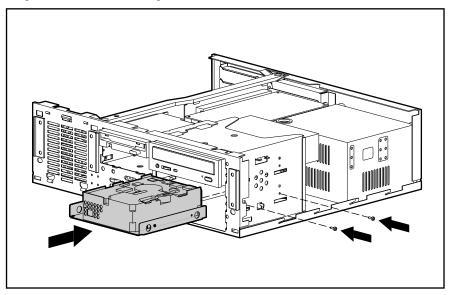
Installing and Securing the Drive into the Chassis on a ProLiant 850R 6/200N
